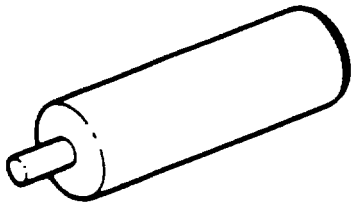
Special Tools and Equipment - Multifuel Engine (Sheet 1 of 3).
